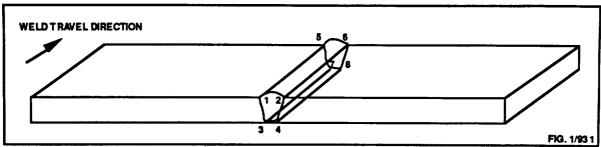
Tensile Specimen Weld Toe Numbering System
